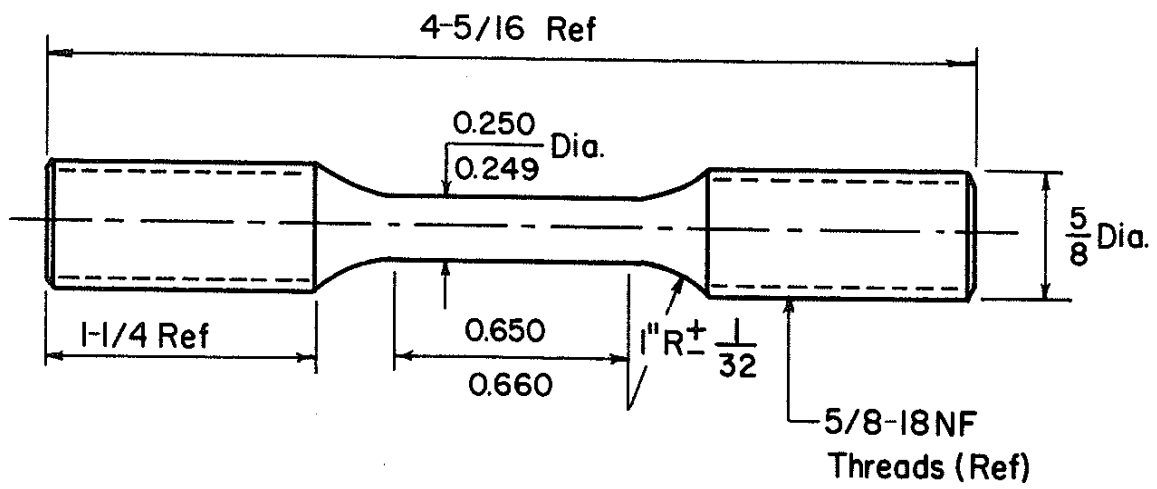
Smooth Specimen Geometry (Dimensions in inches)
